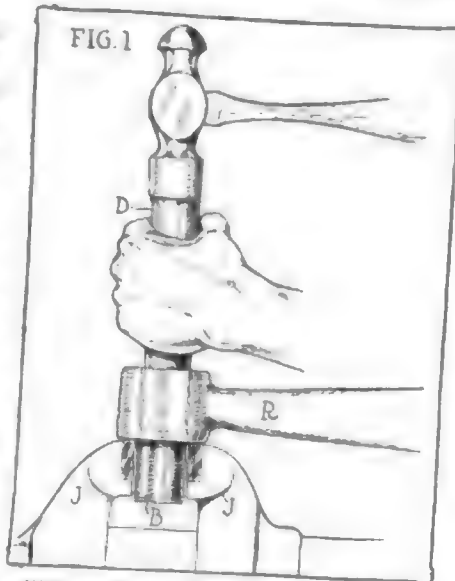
REMOVING CONNECTING ROD BUSHING WITH A HAMMER
